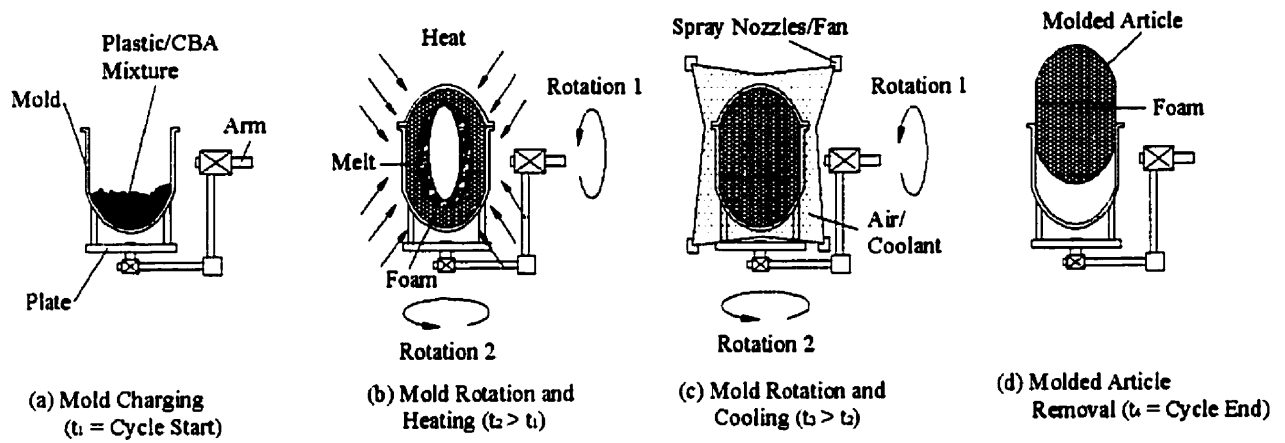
Clamshell-style Rotomolding Machine Principle of Operation
